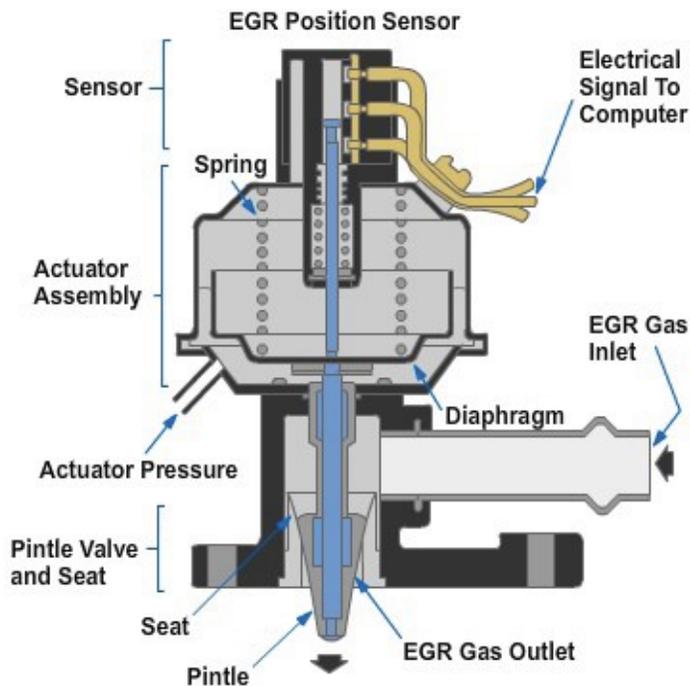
Cutaway of an Electronic-Vacuum EGR valve.
